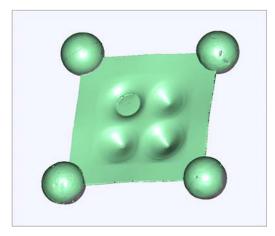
Three-dimensional laser scanning of the testing specimens in the cones of 30 and 40° manufactured through SPIF in plate of 1mm.
